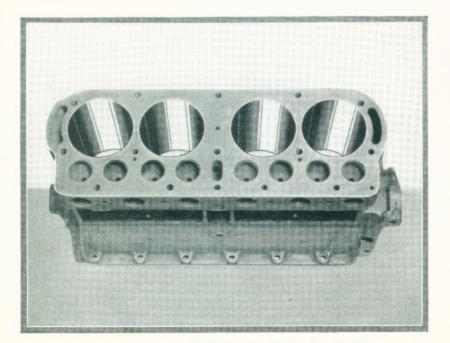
C-Cylinder Block That Has Been Rebored in the Lathe.
